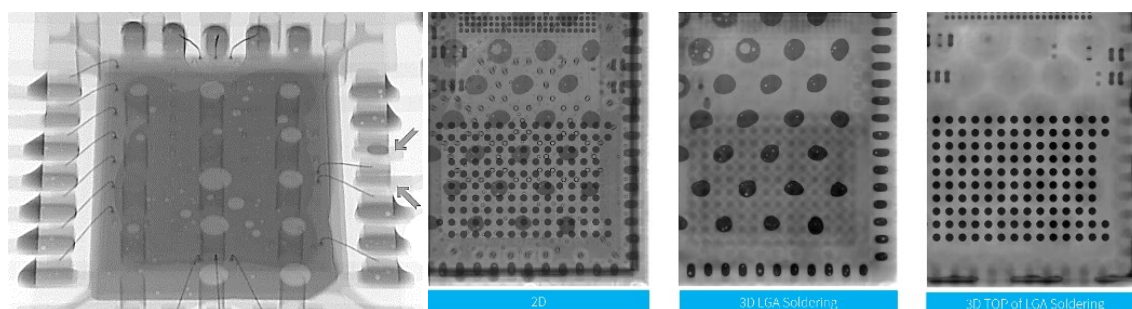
left: QFN inspection, right: LGA inspection – only possible with 3D X-ray technology
